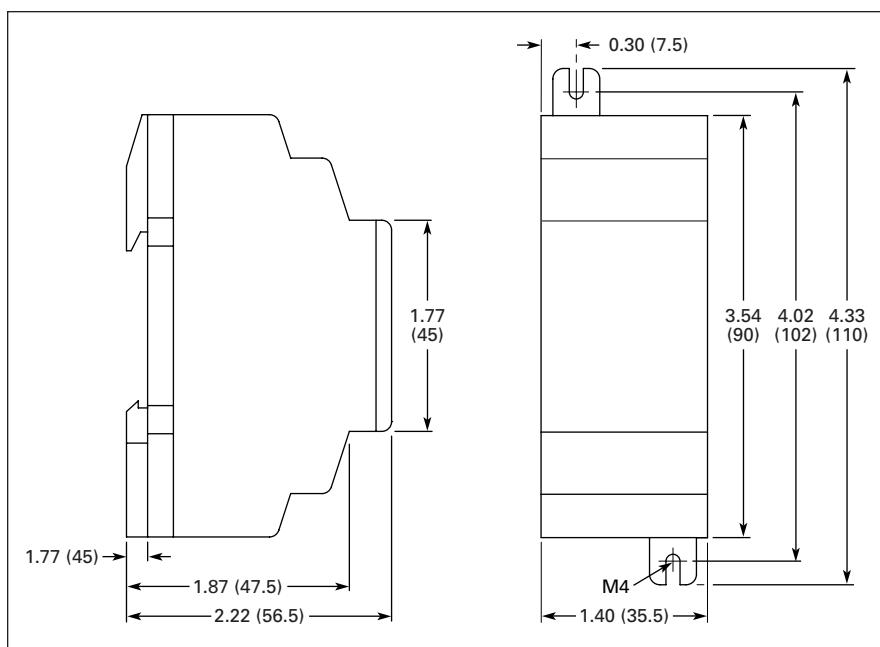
EZ256-HCI Dimensions in Inches (mm)
